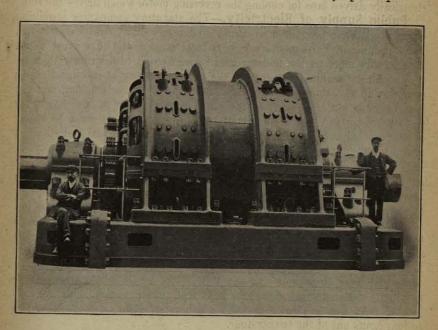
12,000 Horse-power Reversing Motor for driving Reversing Rolling Mill.
